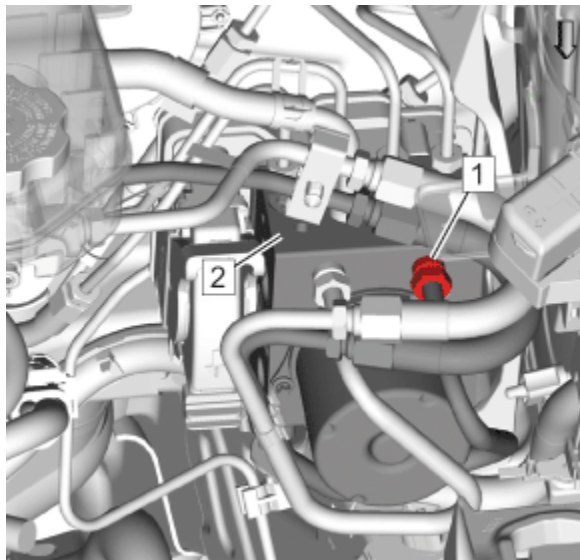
Brake Pressure Modulator Valve And Brake Pressure Modulator Valve Primary Pipe
